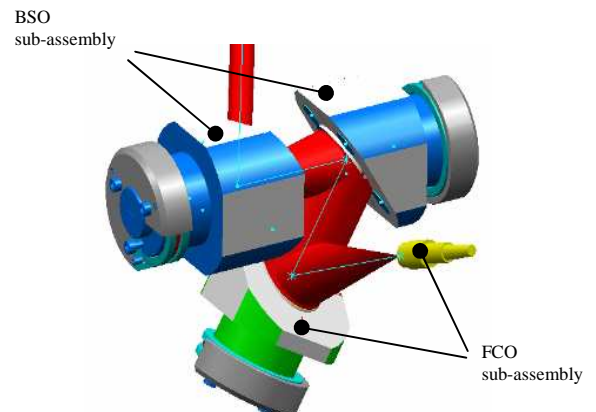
Opto-mechanical set-up of the beam shaping and fibre coupling optics
